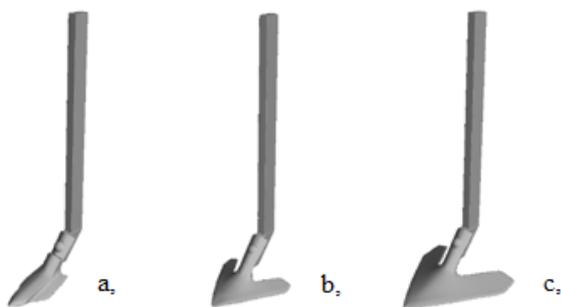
The final geometry of the tools used in the simulations a) small-sweep tool (W:100 mm) b) medium-sweep tool (W:230 mm) c) large-sweep tool (W:300 mm)
